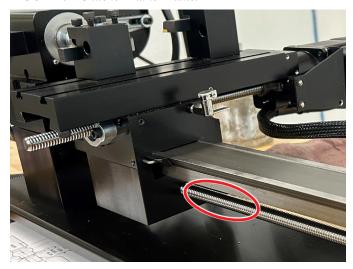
Ball Screw Lathe and Accu-Pro Lathe Z-axis.
